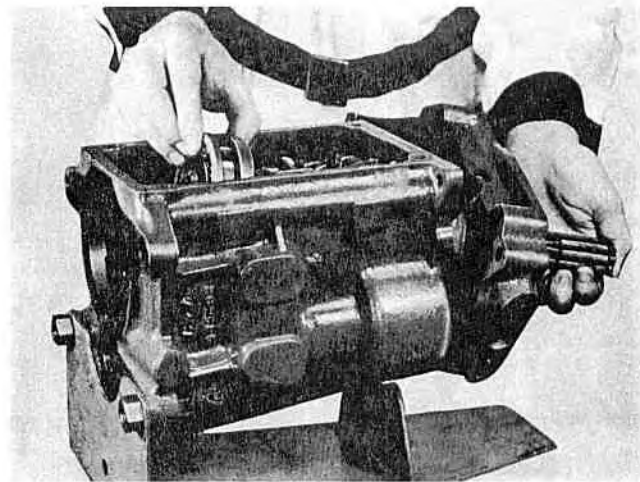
Removing the Adapter Plate and Main Driving Shaft
